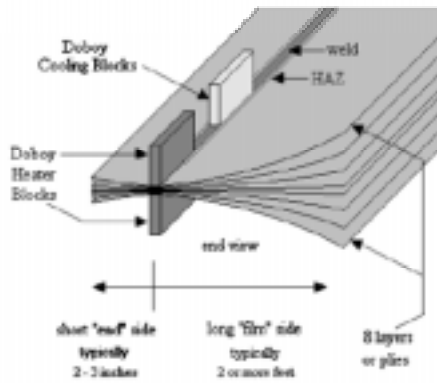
Film welding showing the 8-ply arrangement.
